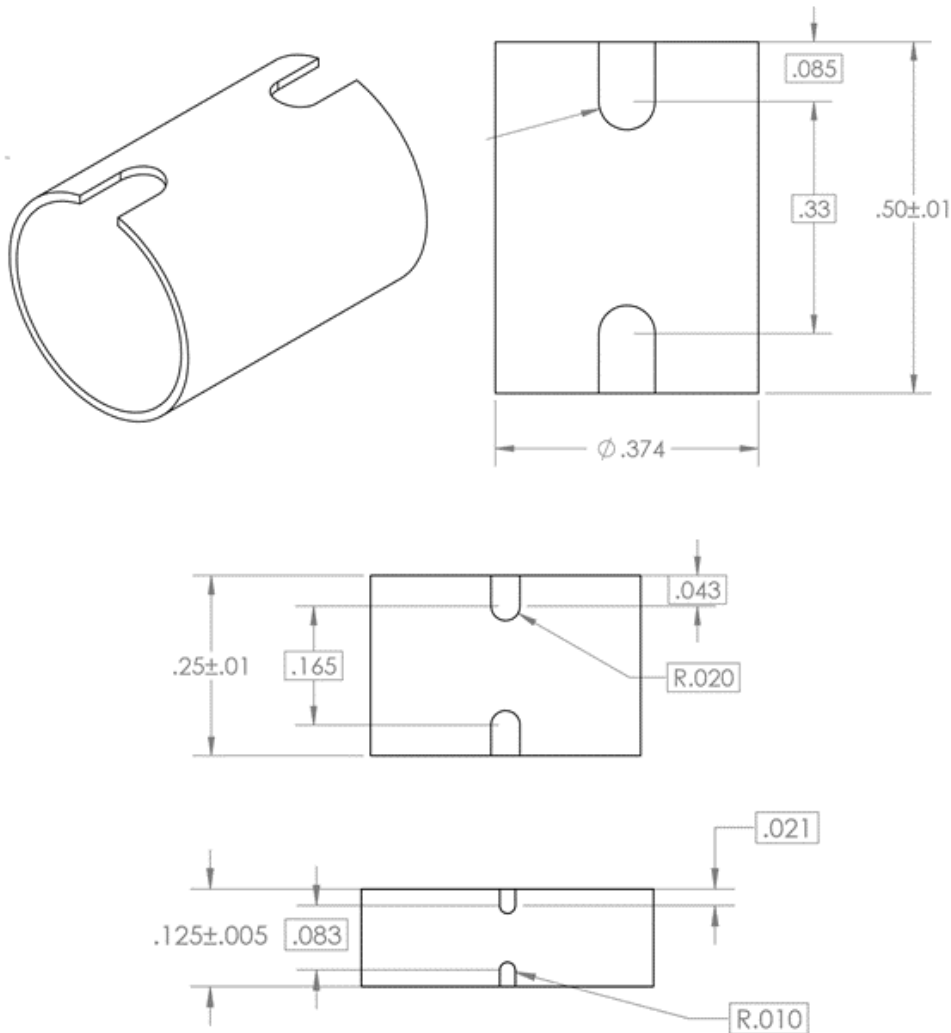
Drawings showing the isometric view and feature dimensions of the standard half-inch specimen (top image) and the dimensions of the proportionally smaller trial specimens (lower two images). Dimensions are in inches.
